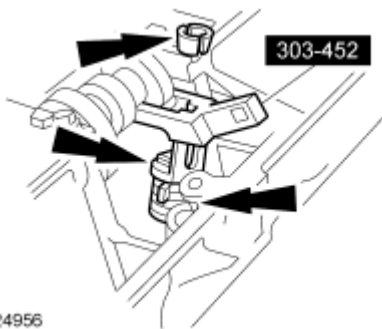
Installing Valve Spring, Valve Spring Retainer & Valve Spring Retainer Keys Using
